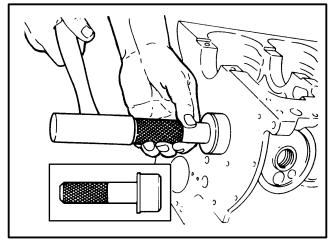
CAMSHAFT BEARINGS, REMOVAL AND INSTALLATION
